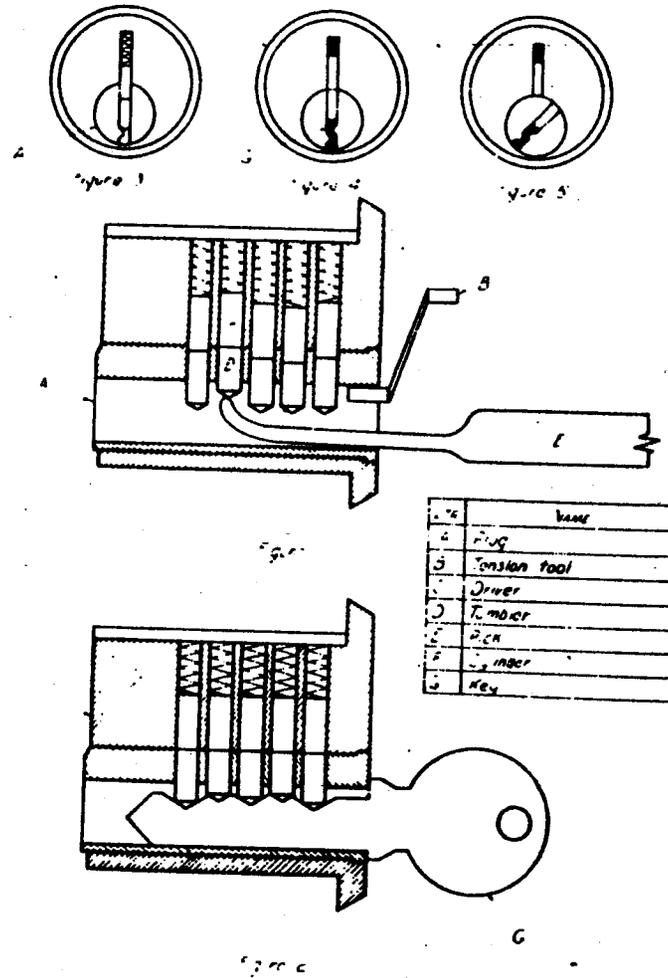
is a front view showing all three tumblers in the opening position with the bolt partially disengaged. This is the position the tumblers assume when the proper key is used. The various depths of the cuts in the key can be seen from the different heights of the tumblers, as shown in figure 6. Figure 6 is a side view.
